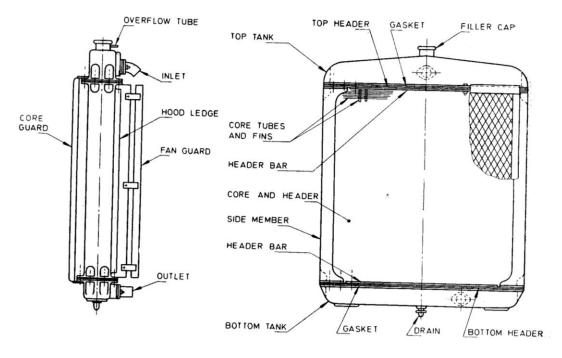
CAST OR FABRICATED RADIATOR (ONE PIECE CORE)
